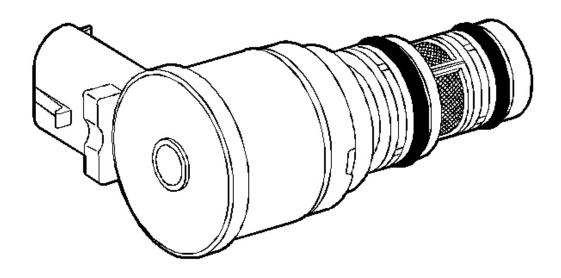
View Of 3-2 Shift Solenoid Valve Assembly Courtesy of GENERAL MOTORS CORP.
